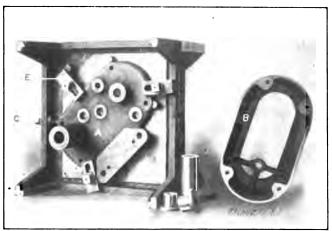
Drill Jig shown in Fig. 75 with Work in Place
